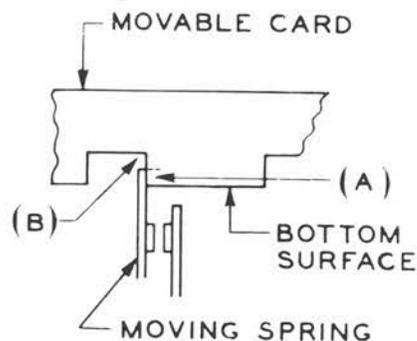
Clearance Between Moving Springs and Card—Clutch Drive
